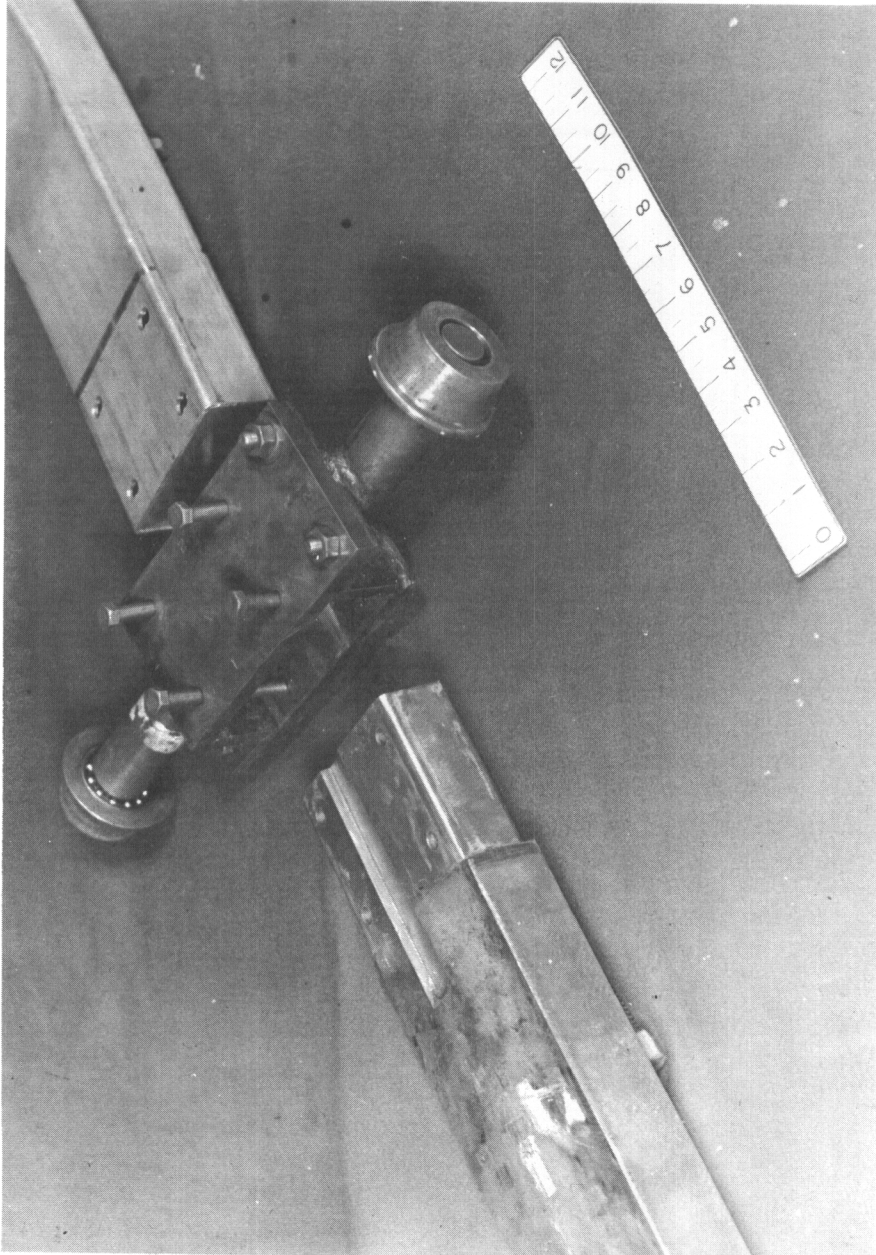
EXPLODED VIEW OF LOAD ARM AND PIVOT POINT ASSEMBLY
